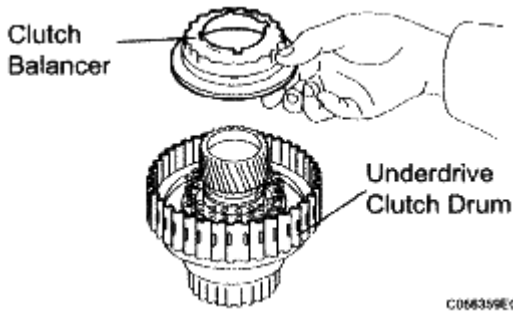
Removing Clutch Balancer From Underdrive Clutch Drum
